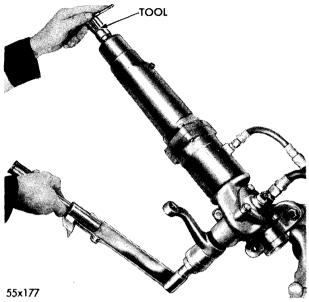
Adjusting Manual Control Valve to Neutral (Tool C-3445)
